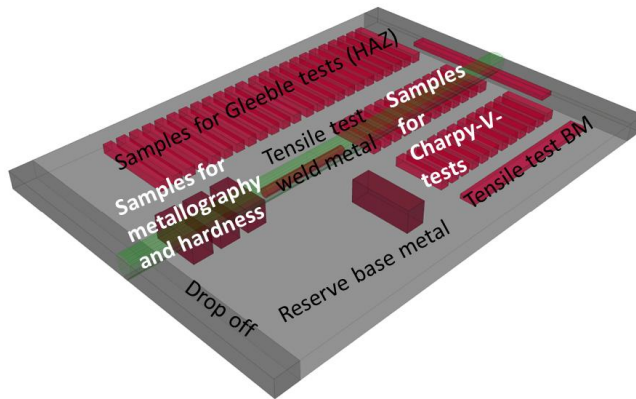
Schematic view of welded plate with sample grid.
